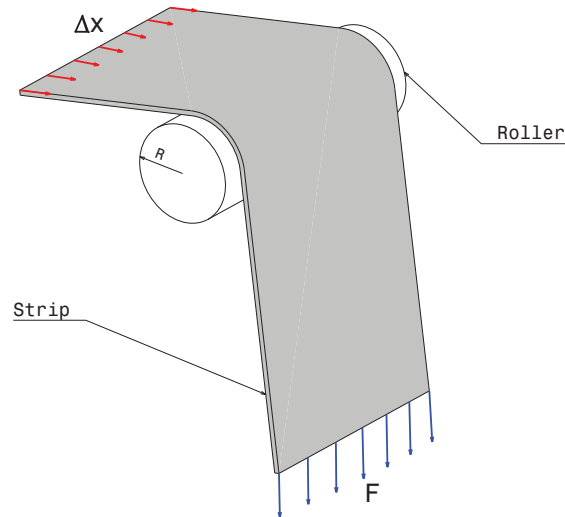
Isometric view of the tooling geometry of the draw-bending test during the drawing phase.
